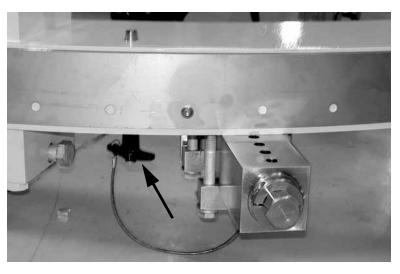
Two frame locking pins (one next to each split point) keep the rotating ring from turning when you split the machine for mounting it on a pipe. Remove the pins before operating the HDSF.
